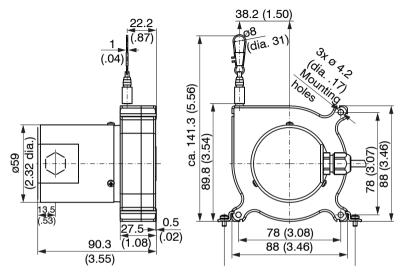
Dimensional drawing WPS- ... -MK88-CR, with potentiometer, dimensions in mm, not to scale
